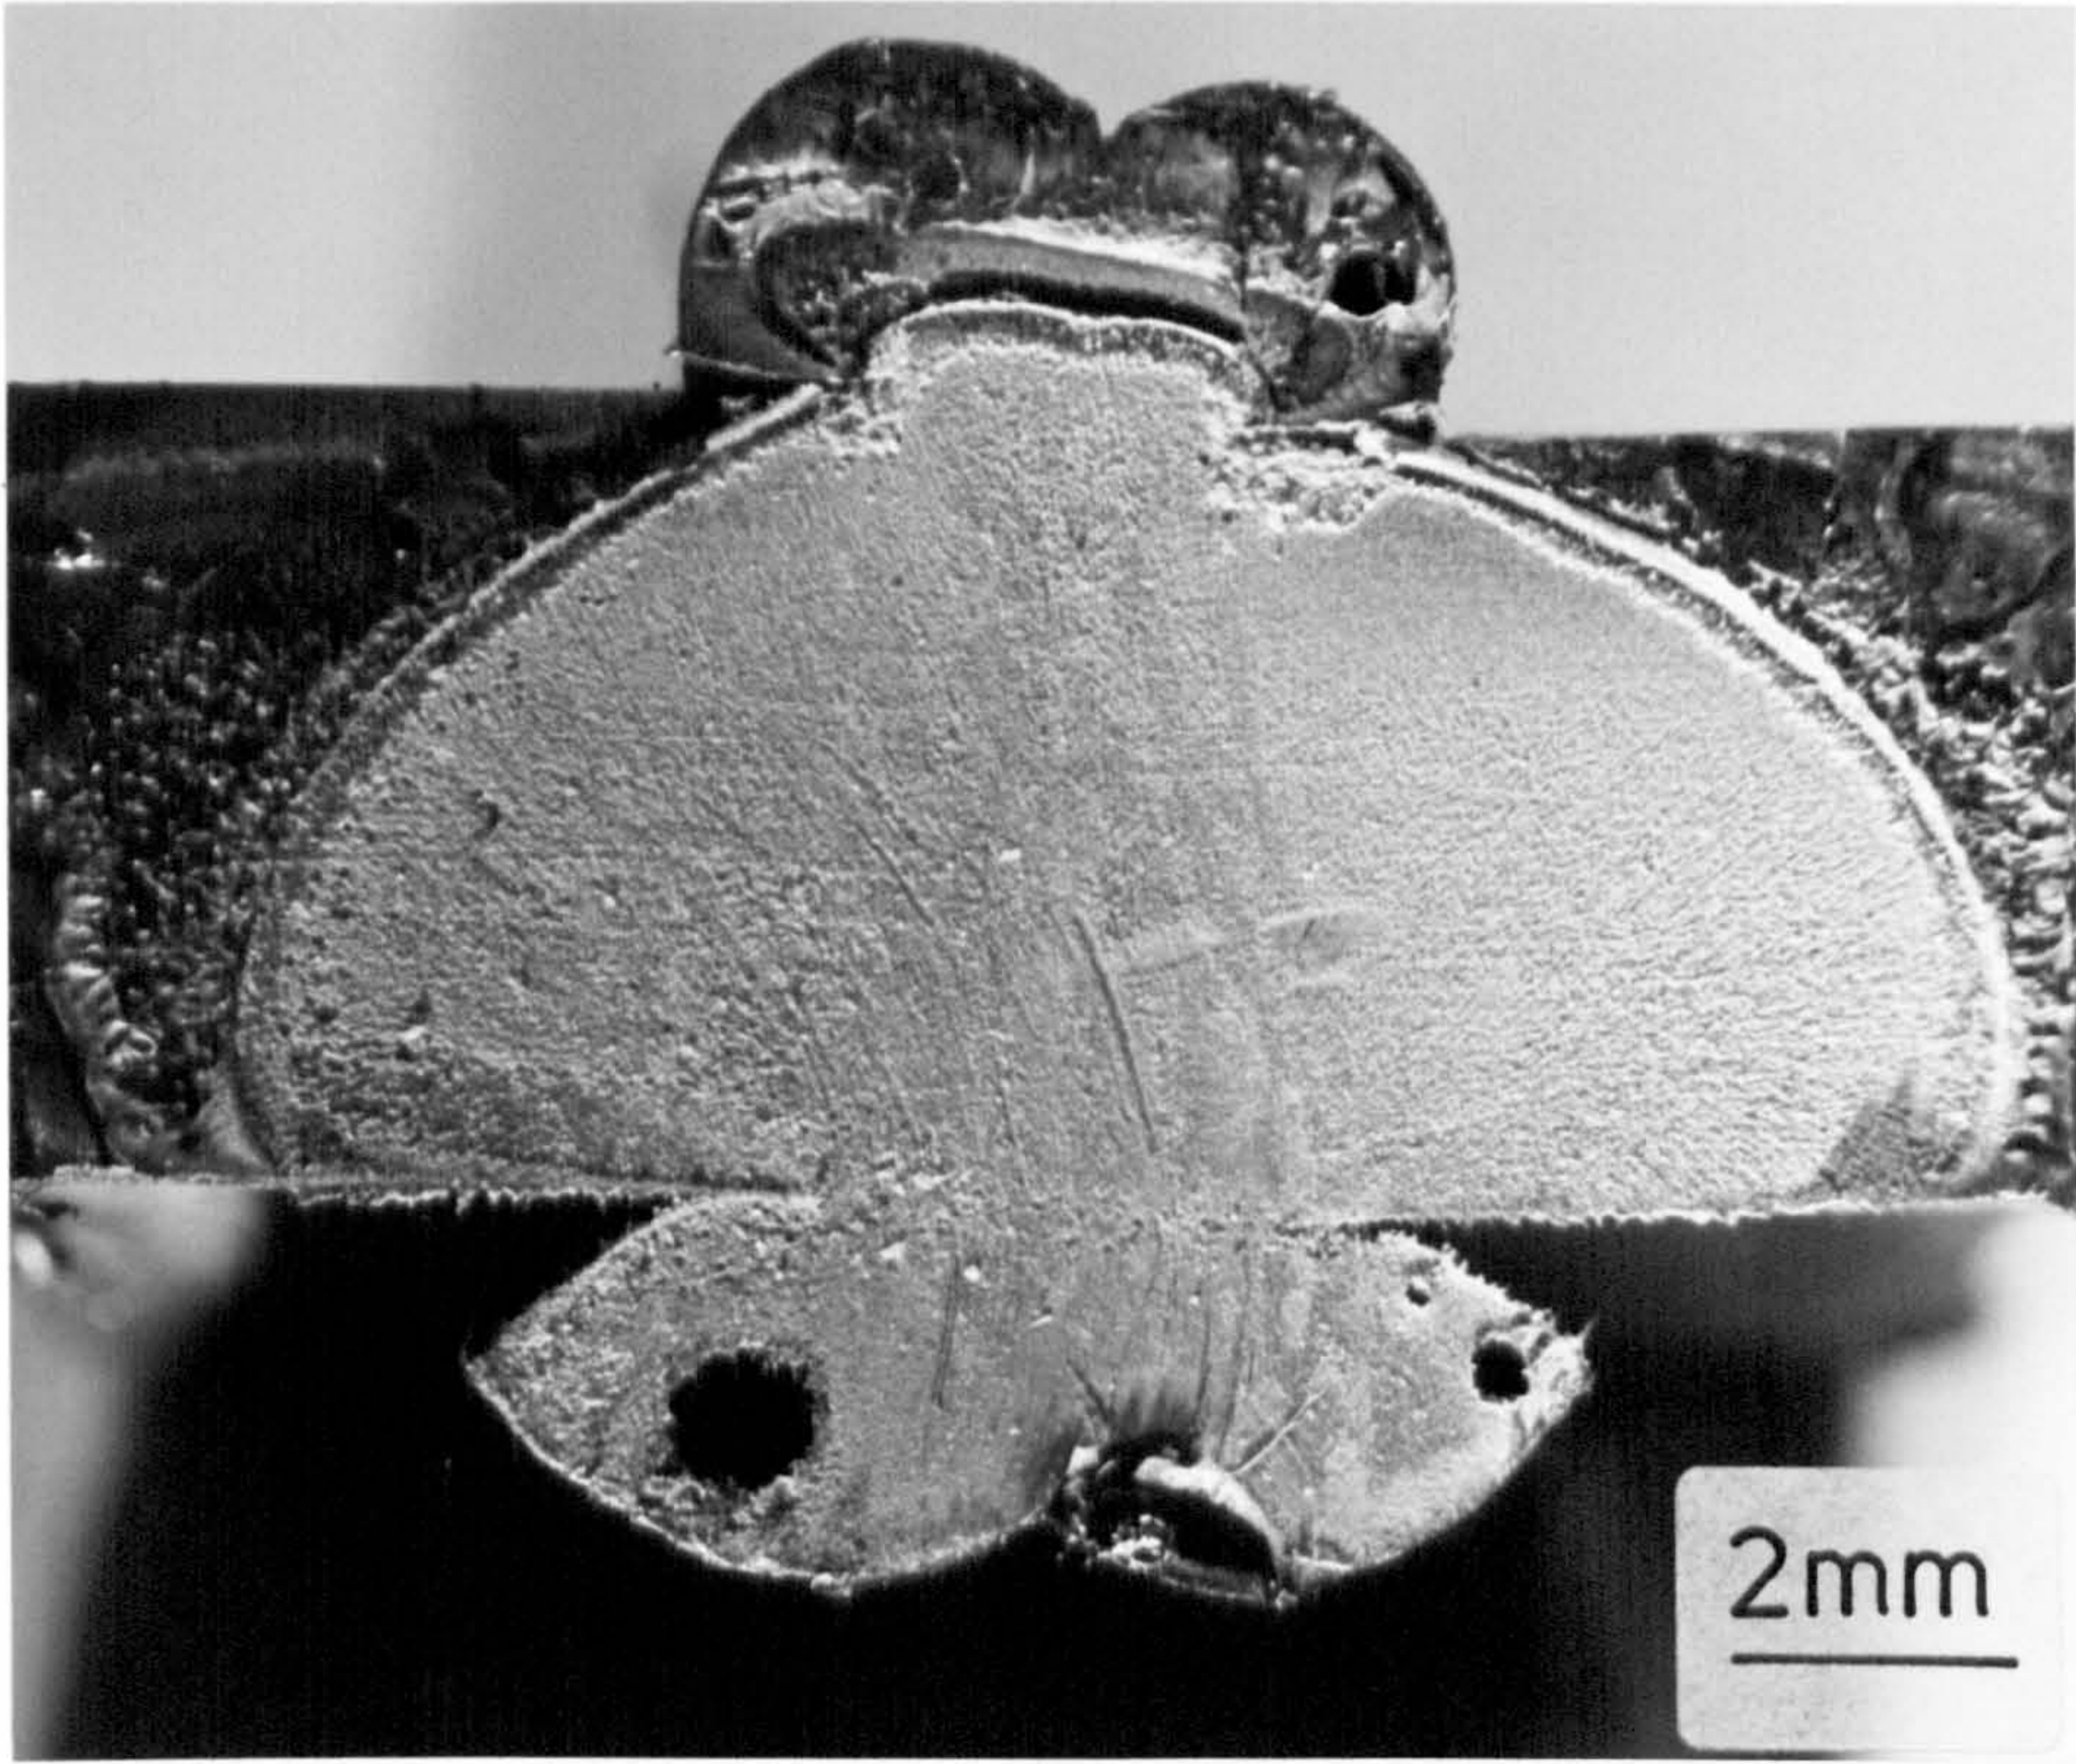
Examples of pipe to pipe (P/P Type 1) butt-weld fractures in HDPE 1 pipe systems.
